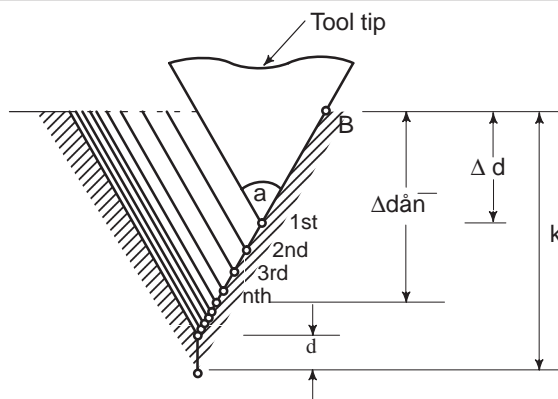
(a) Cutting Path in Multiple thread cutting cycle
